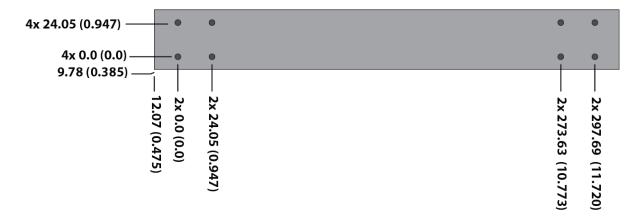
Bracket Screw Holes on the x330-52GTX Switch
